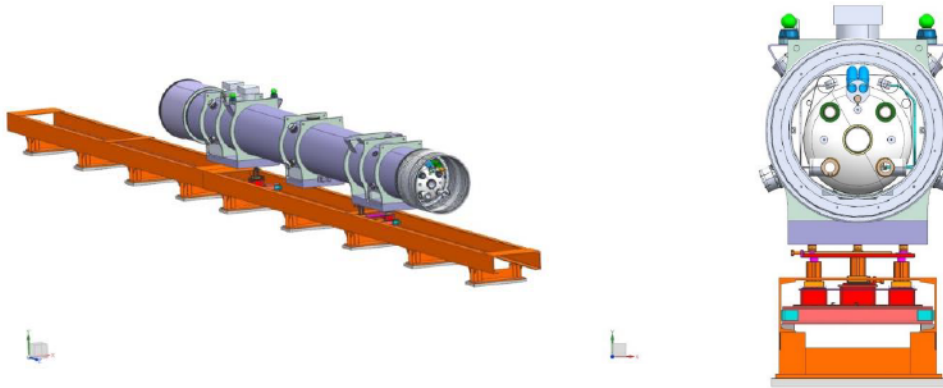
Conceptual design of the 3-point static load support brackets of the Cryo-Assembly.
